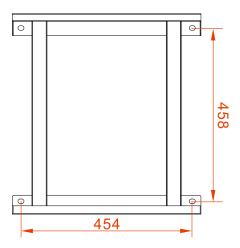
The dimensions of installation holes of installation holder(Unit: mm)
